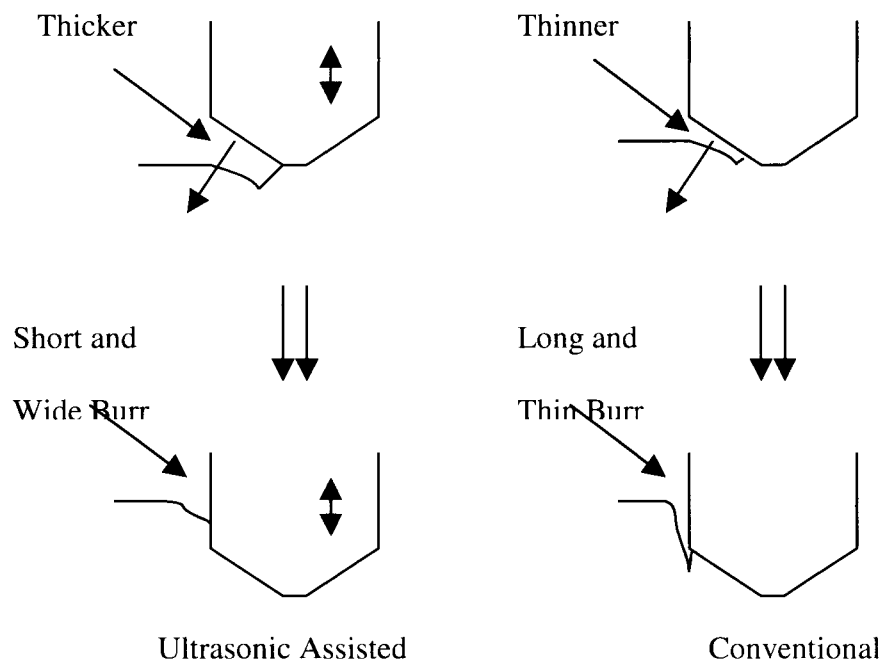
The formation of short and wide burr in ultrasonic assisted drilling.
